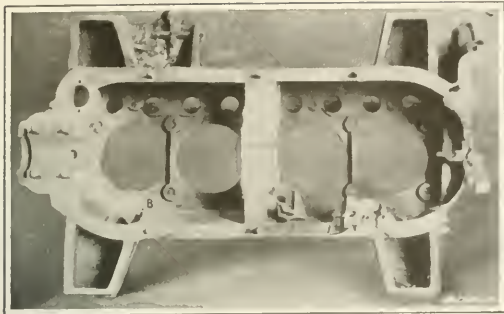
End Bearing finished, Center Bearing built up, and Front Bolting Lug welded
